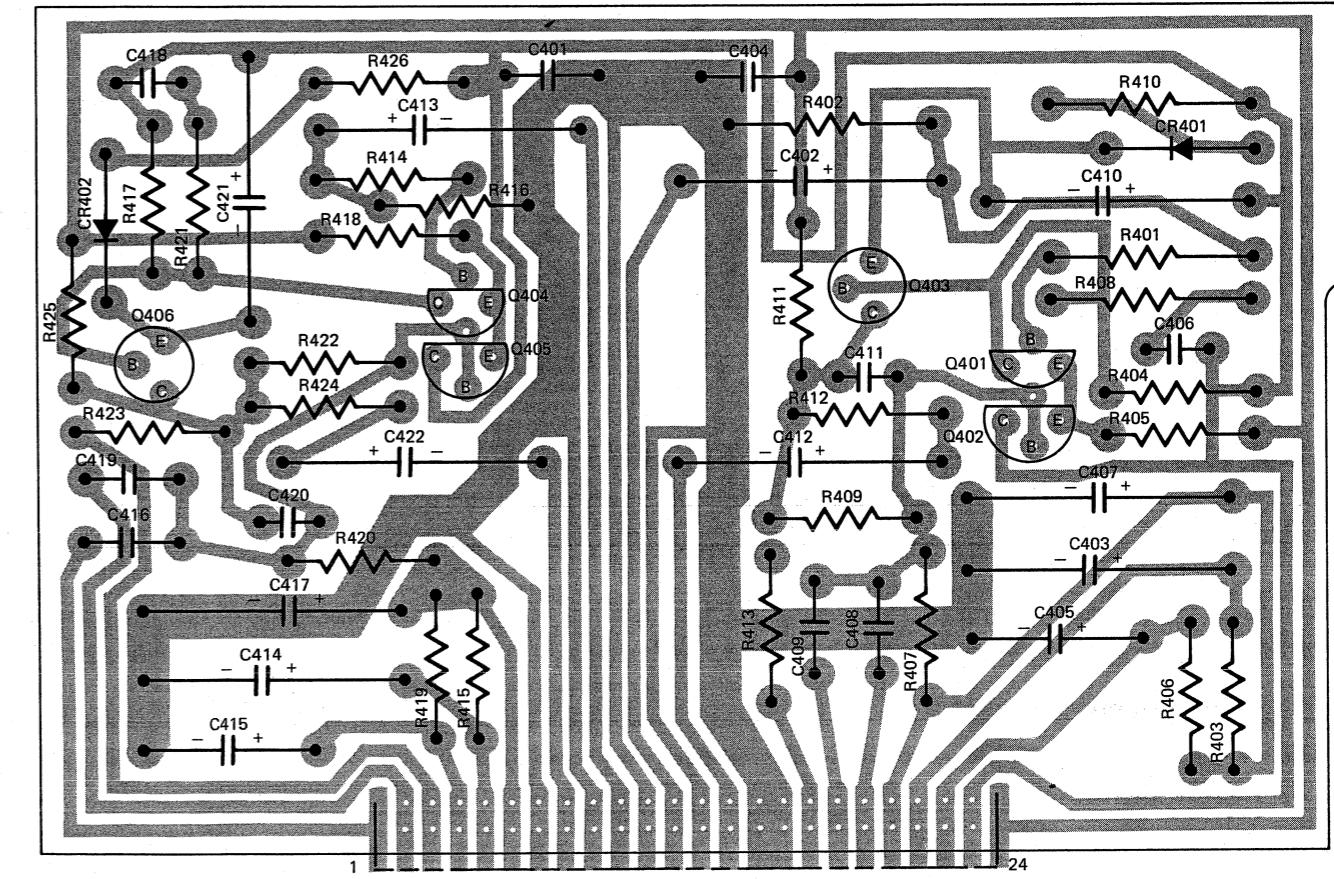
X10 Amplifier Board – A3 Component Assembly Diagram
